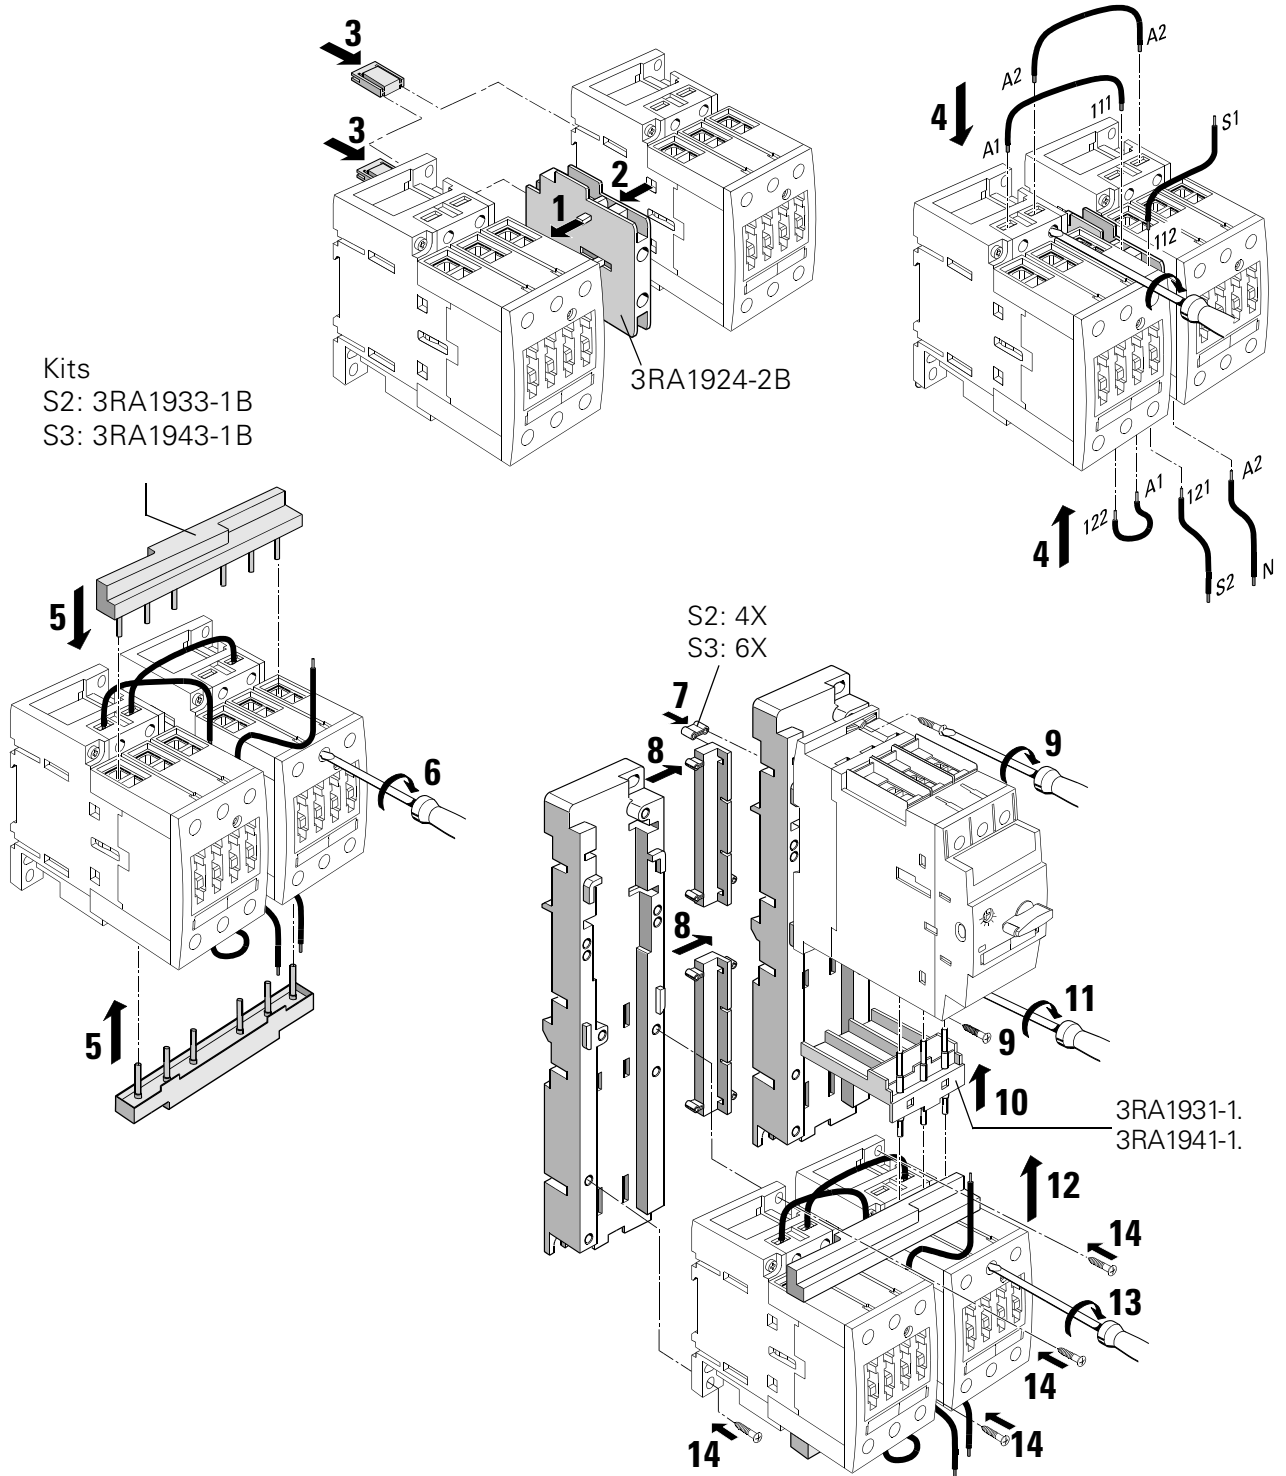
Self-assembly, rail, reversing operation (frame sizes S2 and S3)
